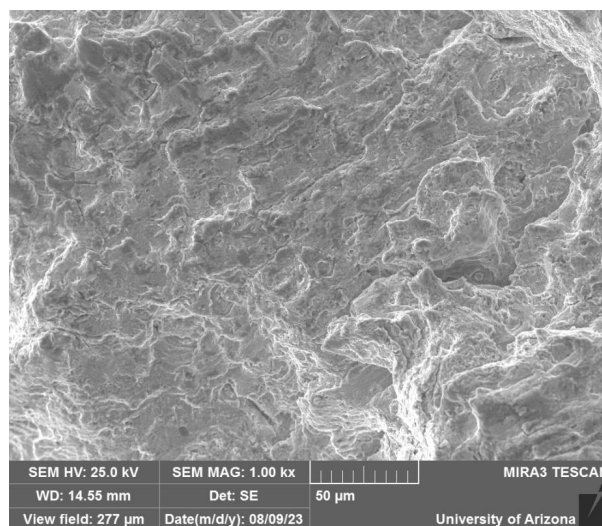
As-built SN4 fatigue fracture surface SEM 1000× magnification.
